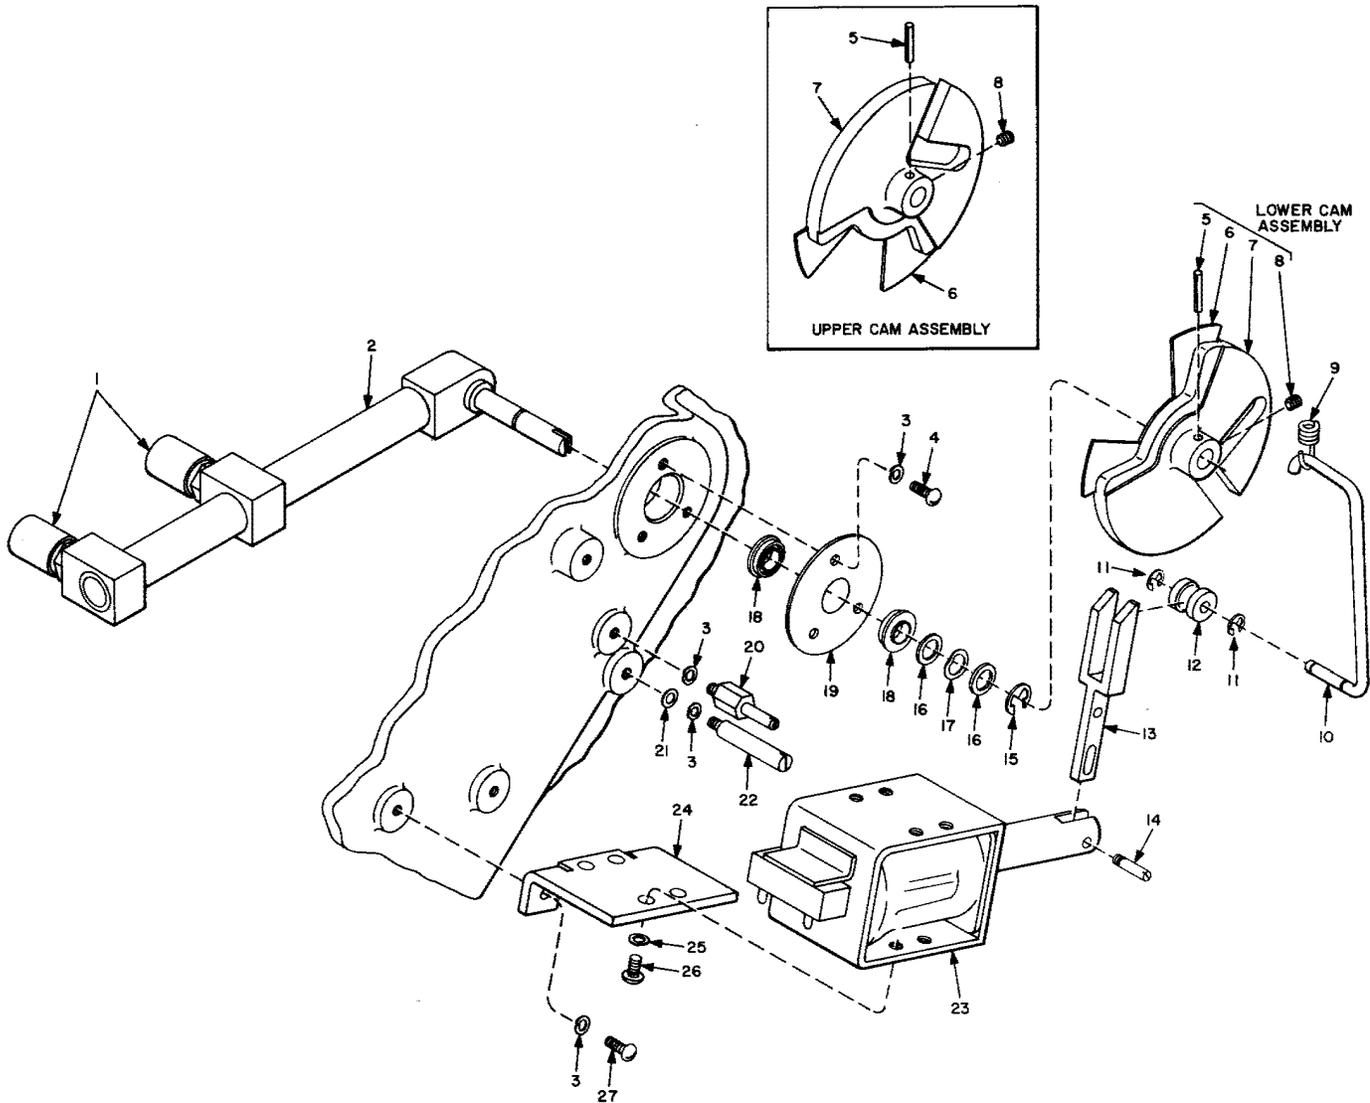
Tape Tension Arm Sensor Assemblies L-502517 and L-502524—Exploded View (Early Version)
